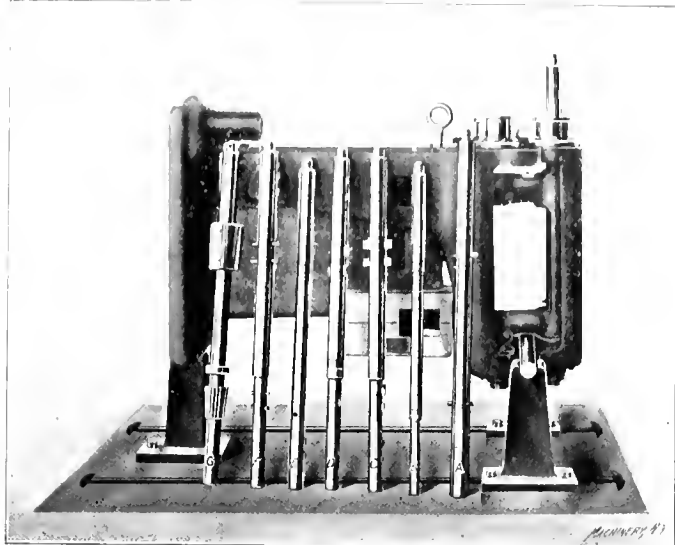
Jig and Boring-bars used for Boring Bracket Holes, Spindle Bearings, and Over-arm Hole.
